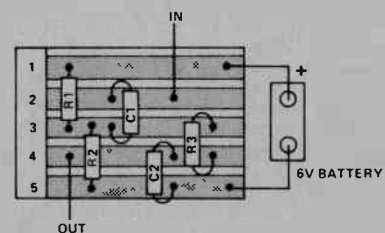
Piece of strip-board with the circuit of Fig.7. assembled.
